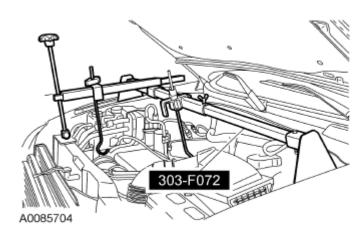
Identifying Engine Support Bar Courtesy of FORD MOTOR CO.
